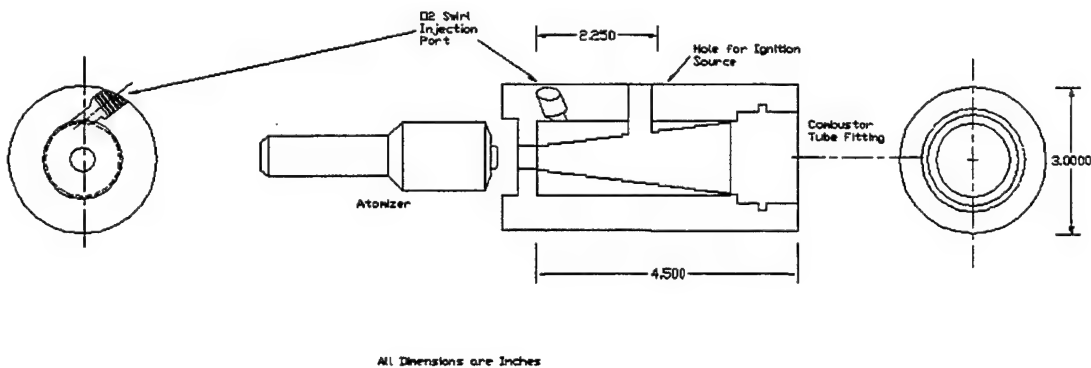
Head-end adapter with stepped geometry inserted.
